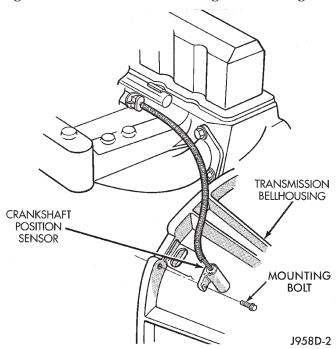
Crankshaft Position Sensor Location—4.0L 6-Cyl. Engine
